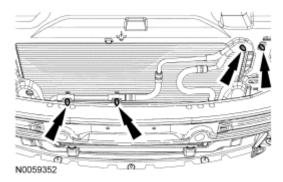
Locating Front Subframe Nuts Courtesy of FORD MOTOR CO.
